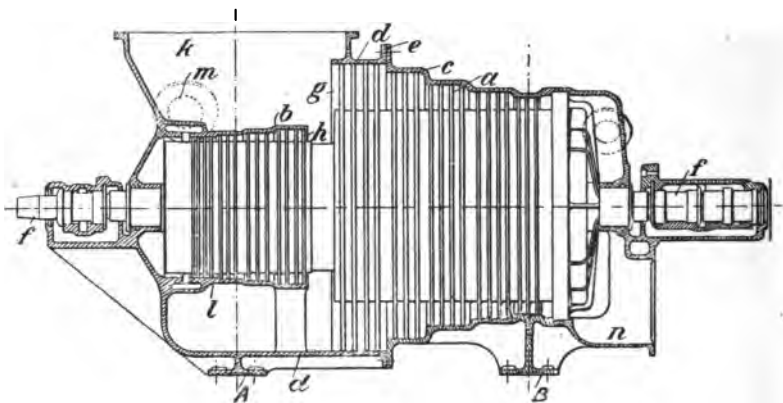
Parsons Arrangement of Main and Reversing Turbines in One Casing.
